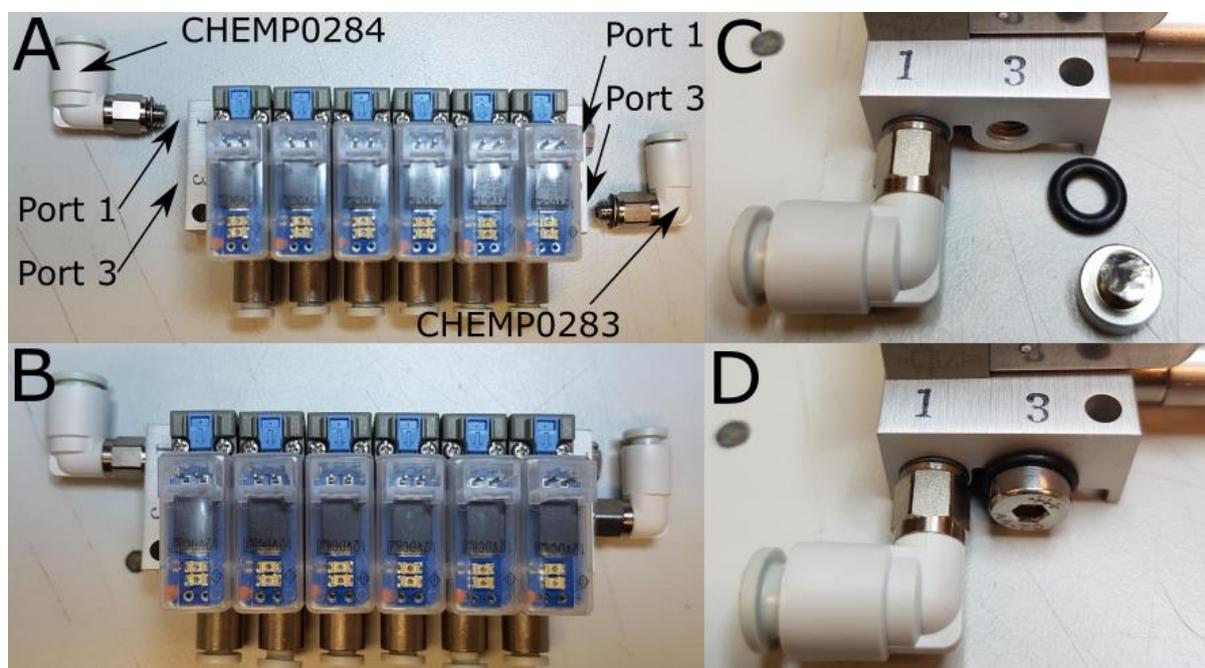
Assembly of the connections to the backend manifold (A and B) and sealing unused ports with a blanking plug (C and D).
